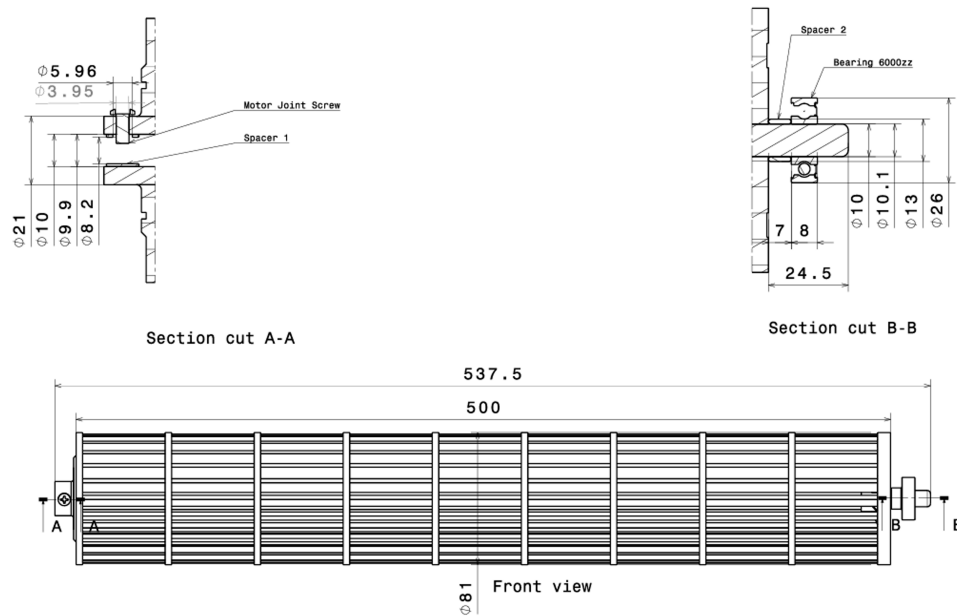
Spacer integrated revised turbine configuration - 500 mm
